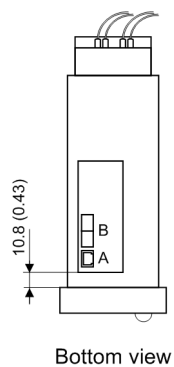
Bottom view of a 7RW80 (housing size 1/6)
